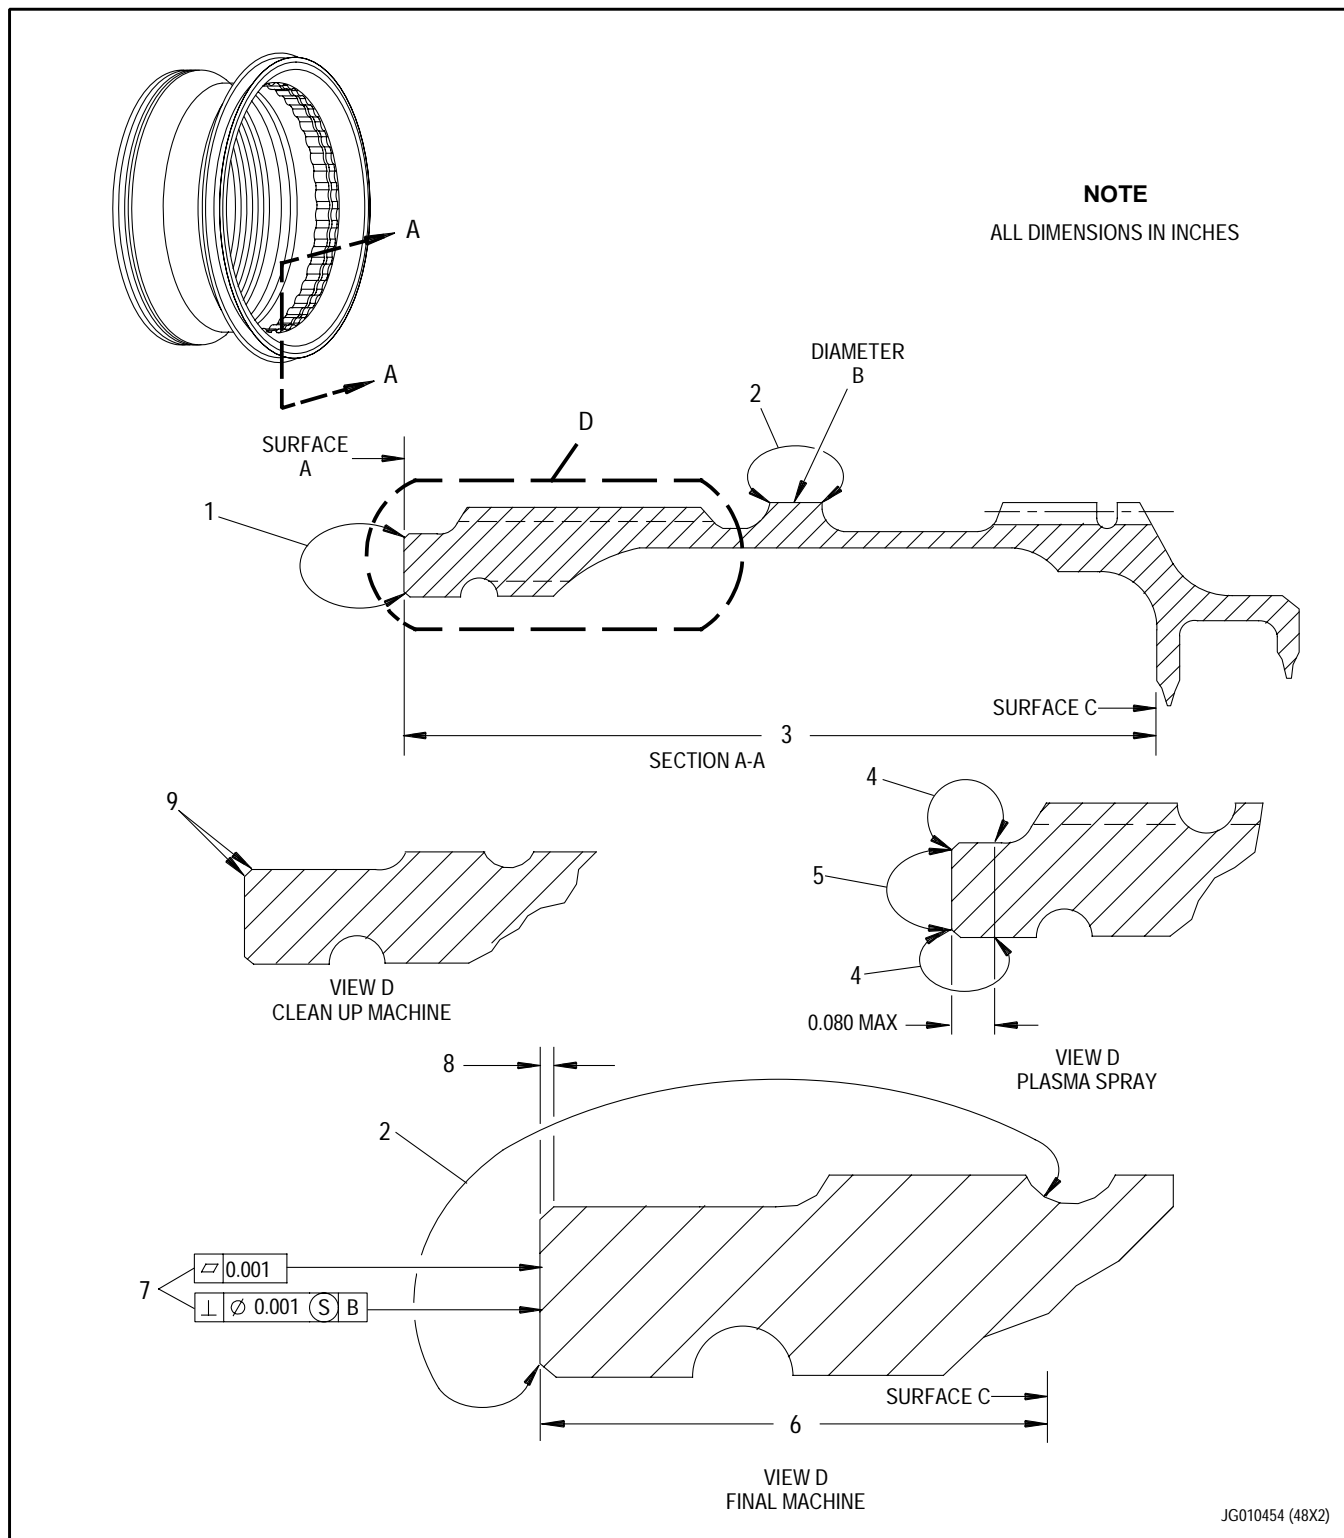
Rear Compressor Drive Shaft Nut - Hardface Replacement on Front Face
